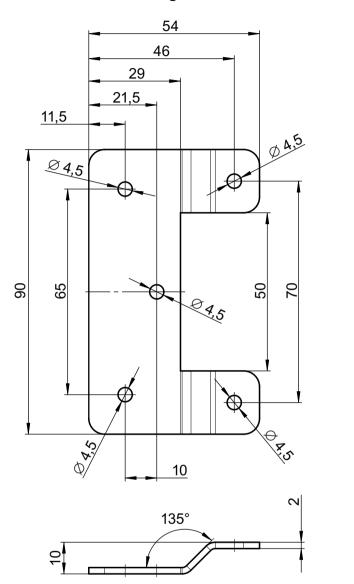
X-300EEC wall mounting (dimensions in mm)
